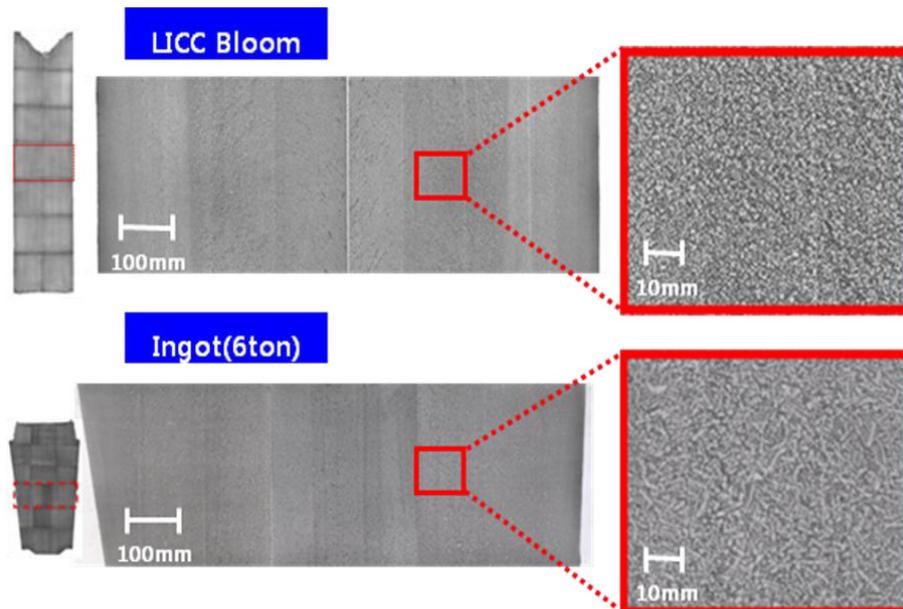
Cast structure of the LICC bloom and 6-ton ingot.
